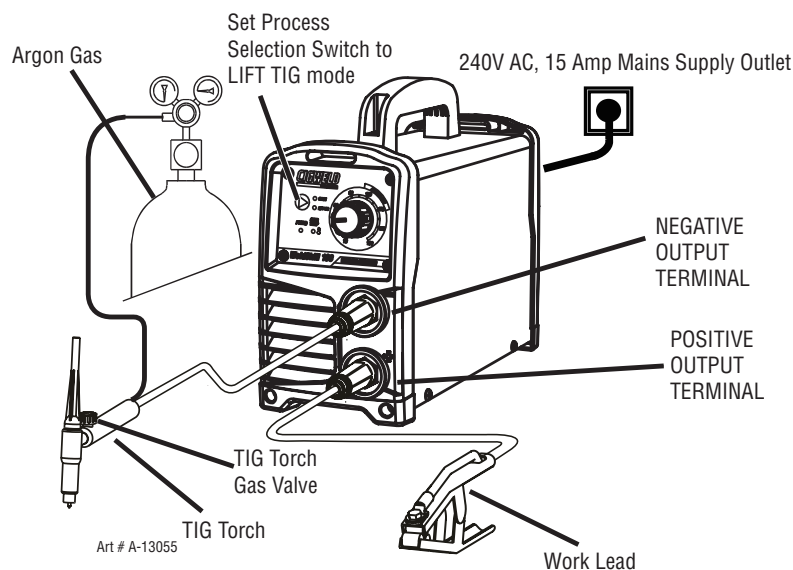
Setup For Lift TIG (GTAW) Welding
